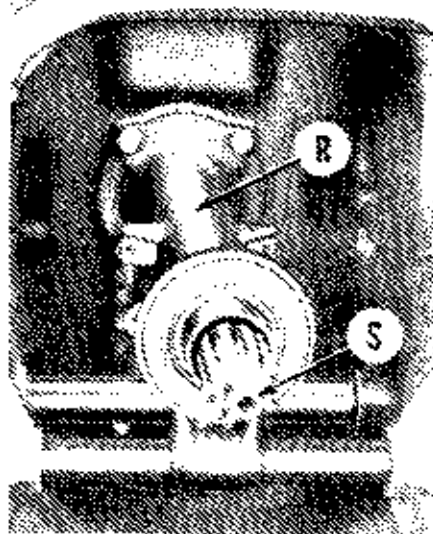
Front view of transmission showing male drive gear (clutch shaft) "S" and bearing retainer "R" which can be removed without detaching (splitting) at the rear axle center housing.
